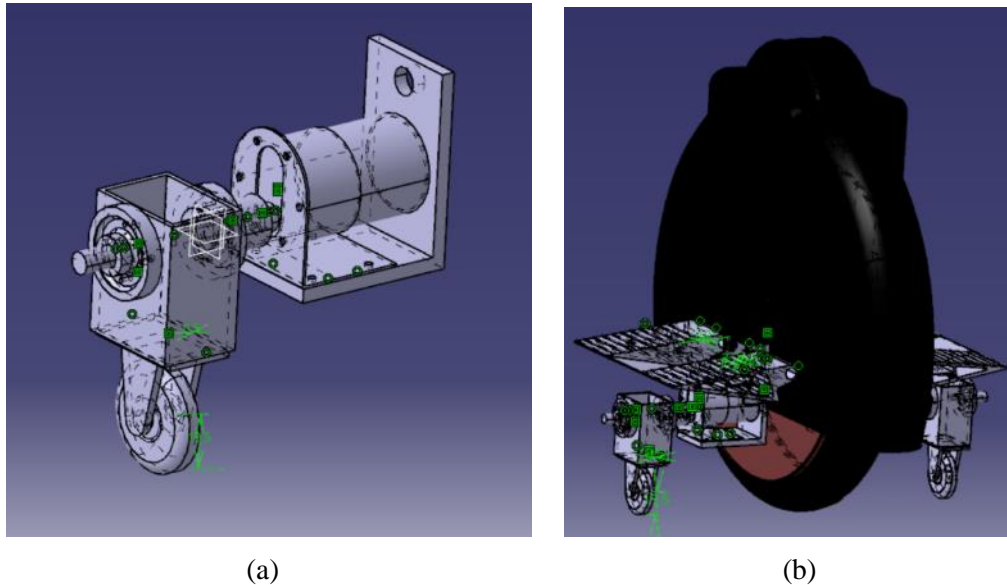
(a) Finalized design of support wheel, (b) Assembly design of support wheel and electric unicycle
